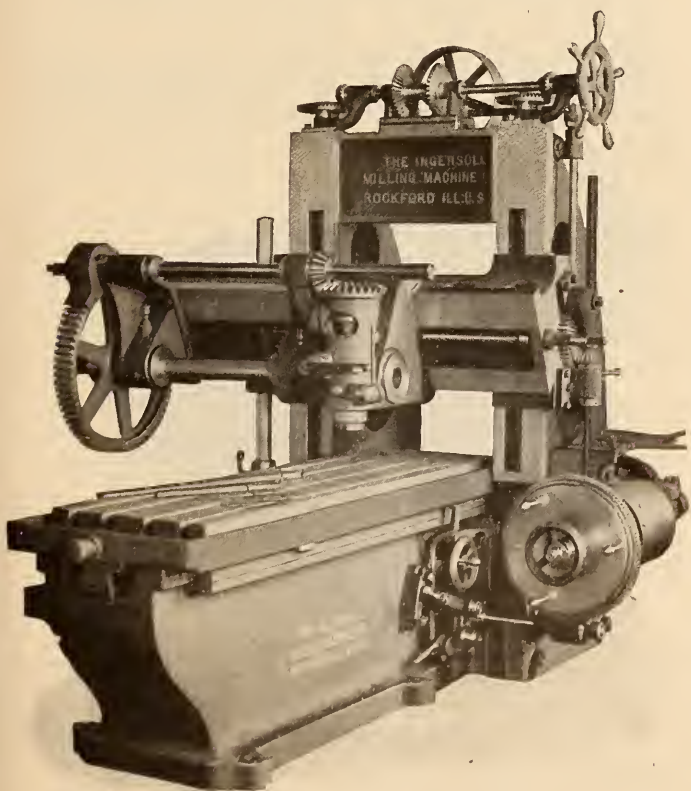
MILLING MACHINE OF THE PLANER TYPE.
